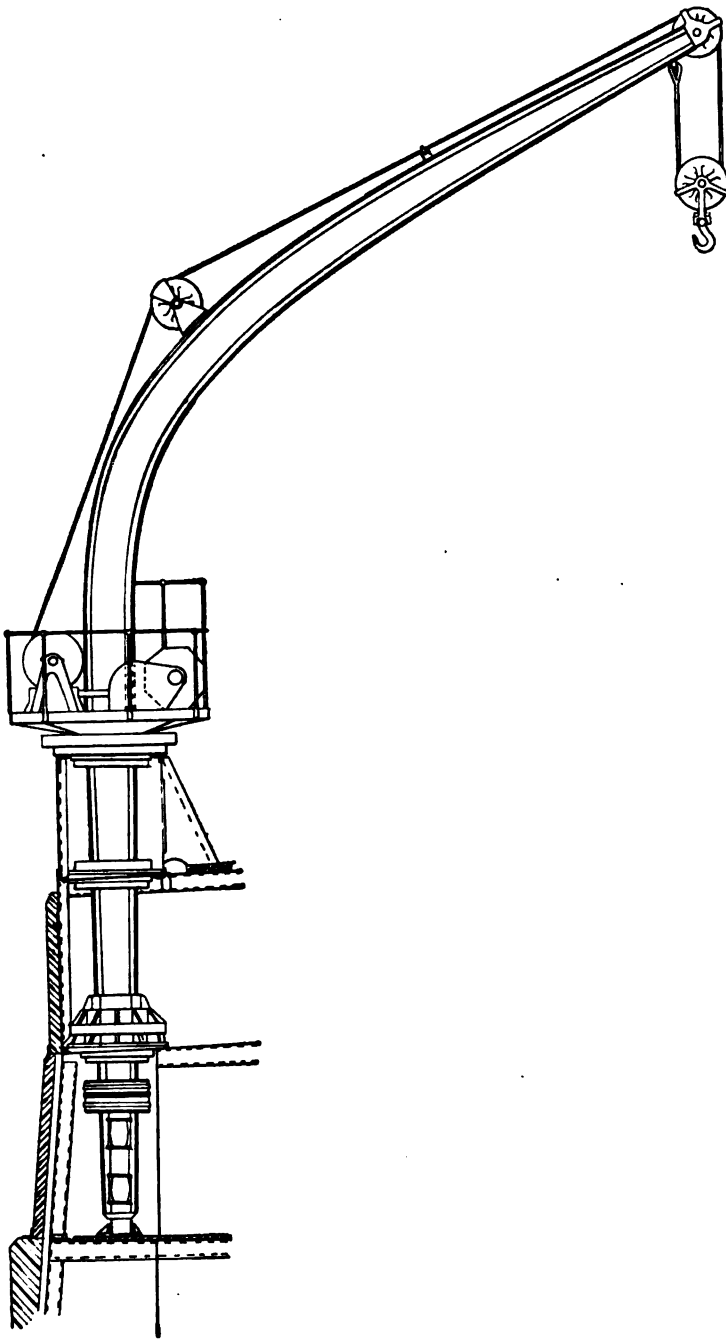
BOAT CRANE BUILT-UP DAVIT TYPE.
